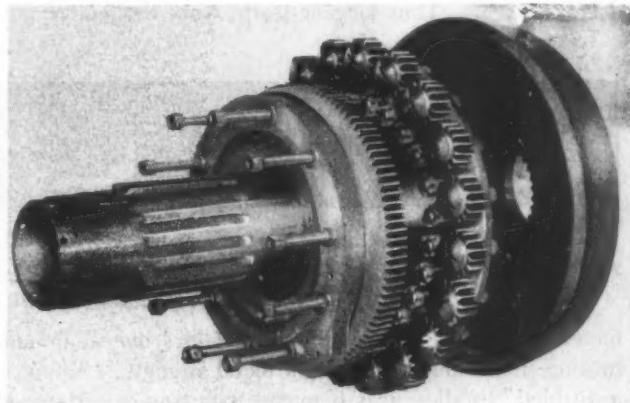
Radial aircraft engine reduction gear employing nitrided ring gear and carburized pinions and sun gear. Each pinion transmits 80 horsepower at take-off, with tooth contact pressure 120,000 pounds per square inch
